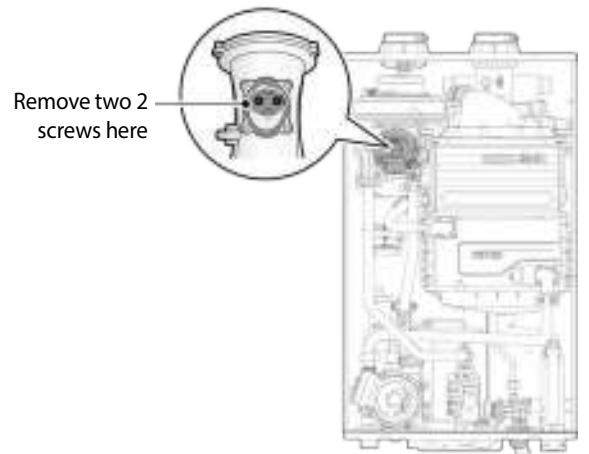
Detaching Gas Valve from Gas Inlet Pipe and Fan Motor Assembly
